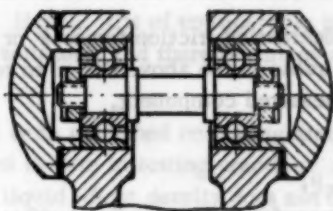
Securing of the modified axle assembly for suspending the segment.
